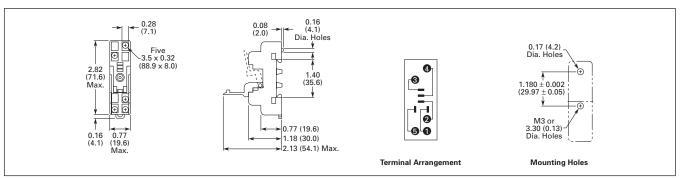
D4PA1 — Approximate Dimensions in Inches (mm)
